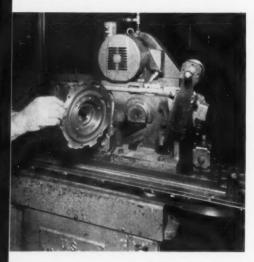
Part is mounted in Hy-Flex mill for machining the grooves indicated in Fig. 3.
